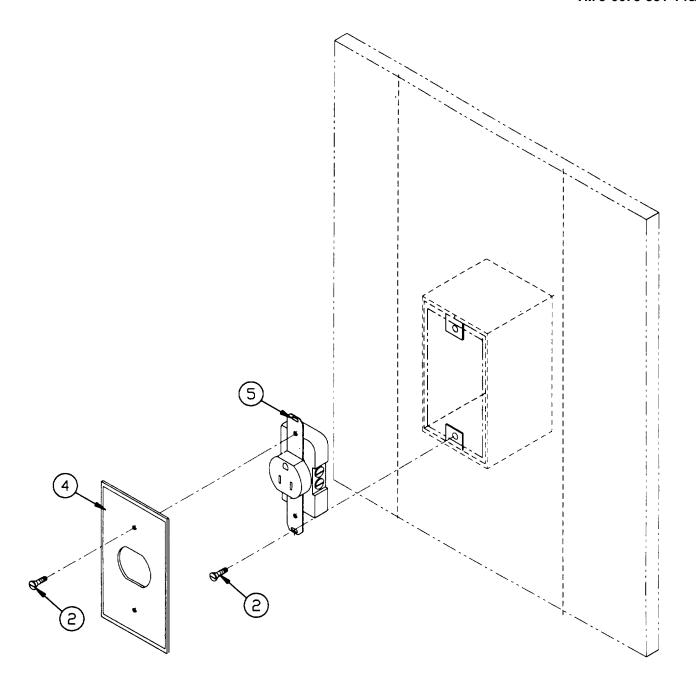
ELECTRICAL ASSEMBLY (SHEET 4 OF 7)
